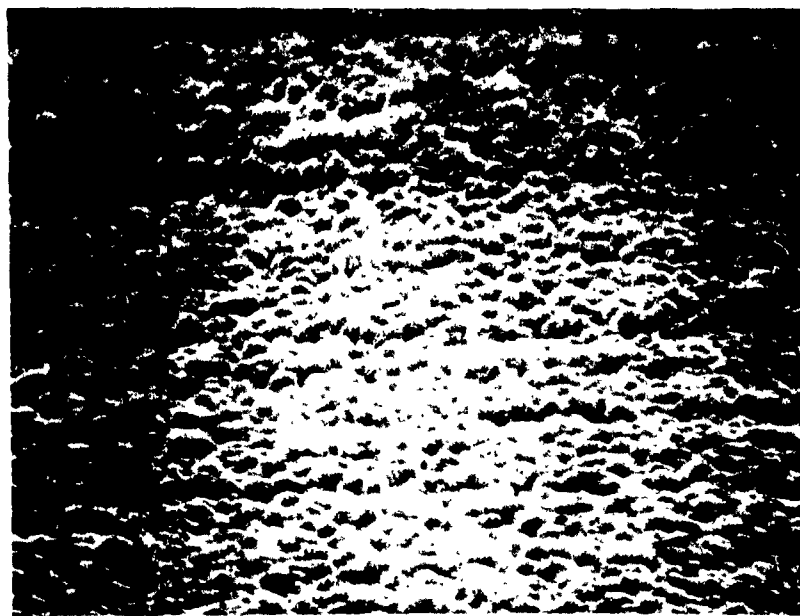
Surface of coated metering valve spindle (Pump Serial No. 5258129)
